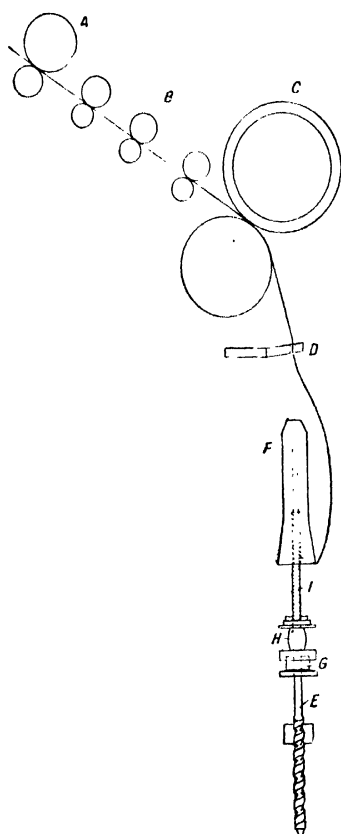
Cap Spinning Frame.—*A*, back rollers; *B*, carriers; *C*, front rollers; *D*, eyelet board; *E*, spindle fixed in framework; *F*, cap supported by spindle; *G*, bearing for tube *I*; *H*, whar round which driving tape passes; *I*, tube upon which bobbin or spool is fixed and carried round.
